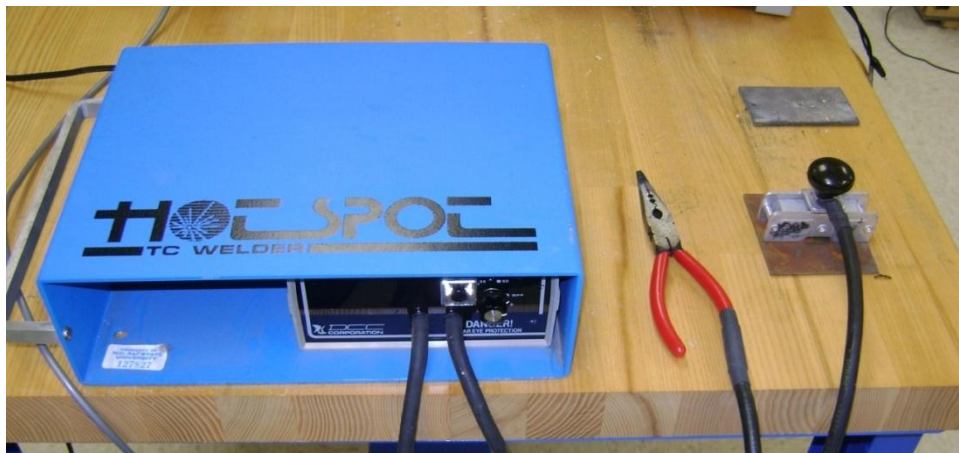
Photograph of the DCC Corporation Hotspot thermocouple welder.
